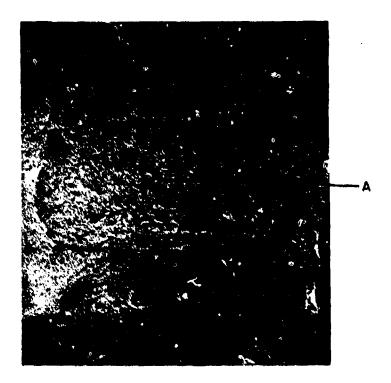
Fracture surface of an A-514 weld Charpy specimen tested at  $-18^{\circ}\text{C}$ , 8x.
